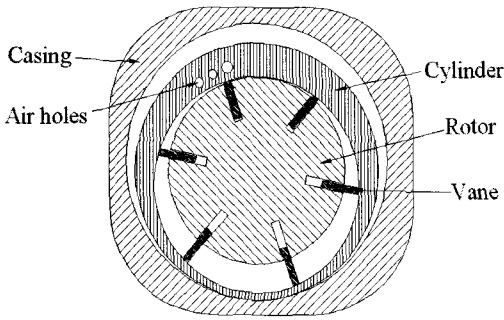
Cross sectional view of rotating part used in a vane-type air tool
